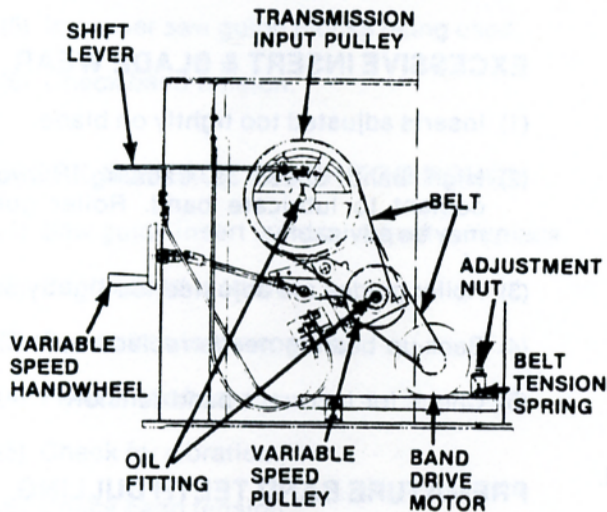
ADJUSTING DRIVE MOTOR BRACKET SPRING.
